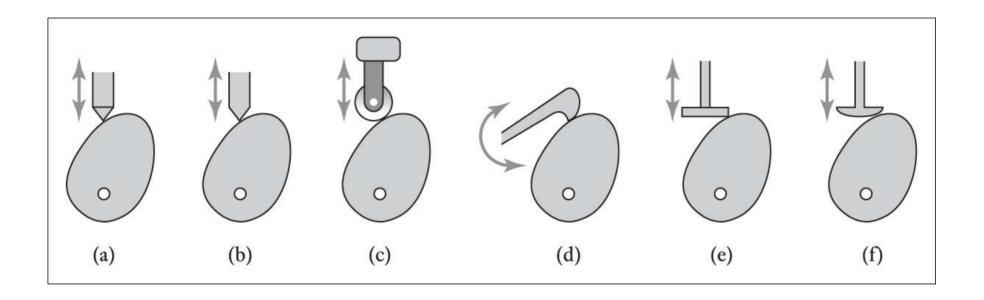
Cam followers: (a) point, (b) knife, (c) roller, (d) sliding and oscillating, (e) flat, (f) mushroom
